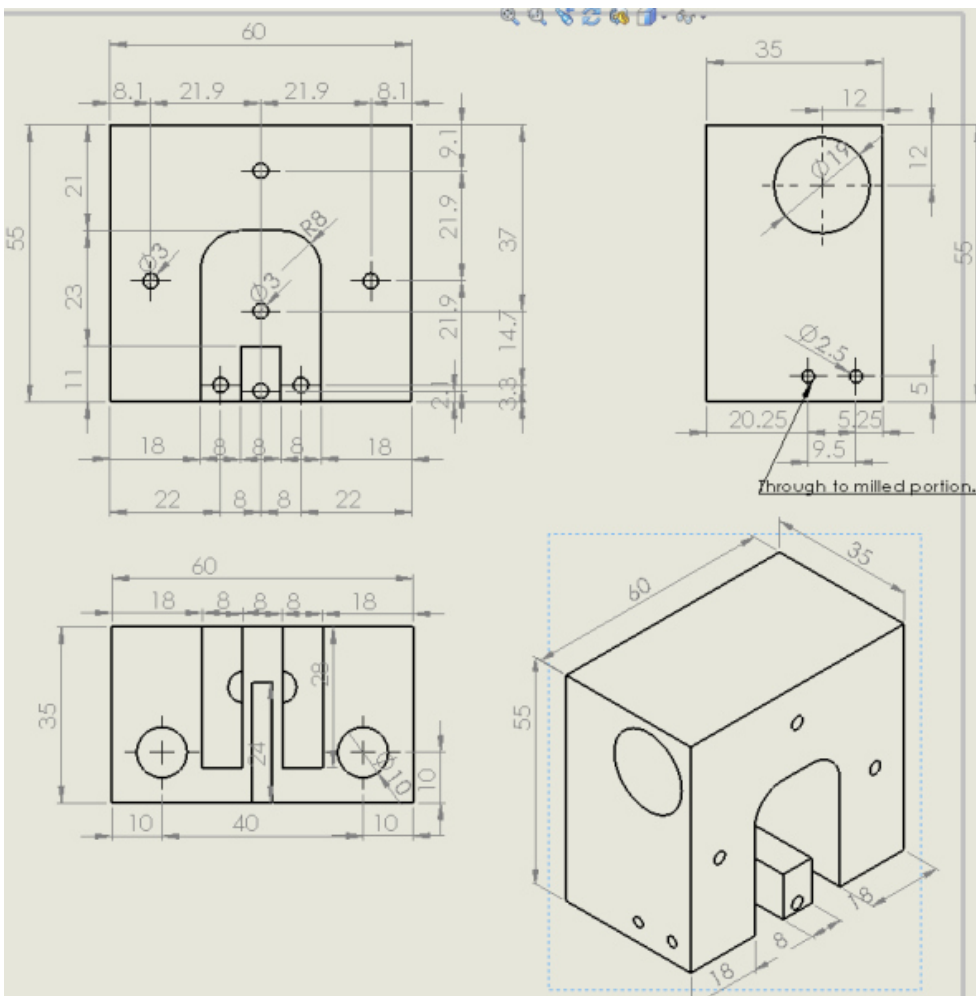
'Endplate v1.1'. This is where the moving motor attaches onto. Also includes homing switch mounting.
